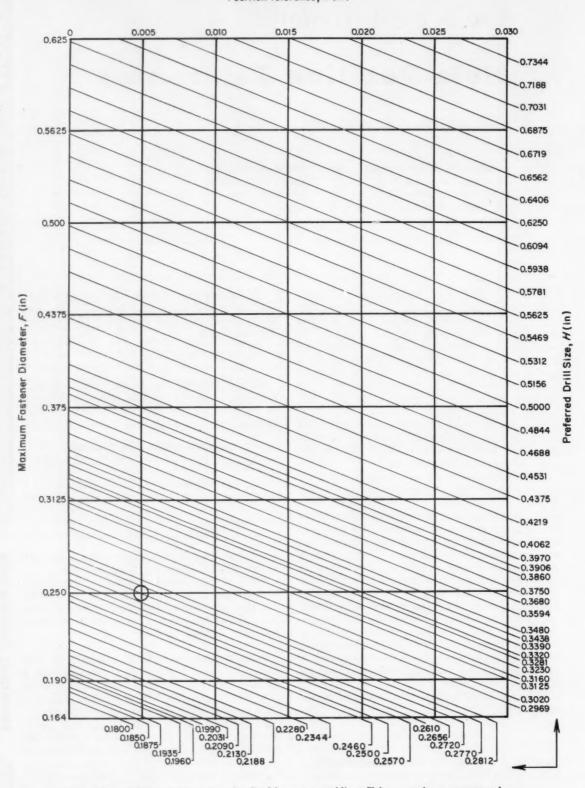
True-position tolerance chart for fixed-fastener assemblies. Tolerance values are expressed as a radius of true position at maximum material condition. Circled point is solution for example.
